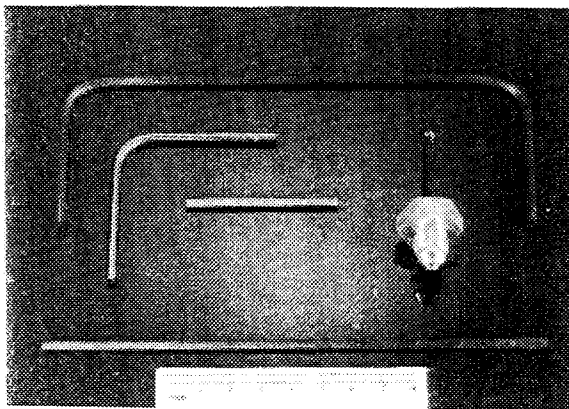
Partially and fully extruded finned beryllium tube, produced by the filled billet technique
